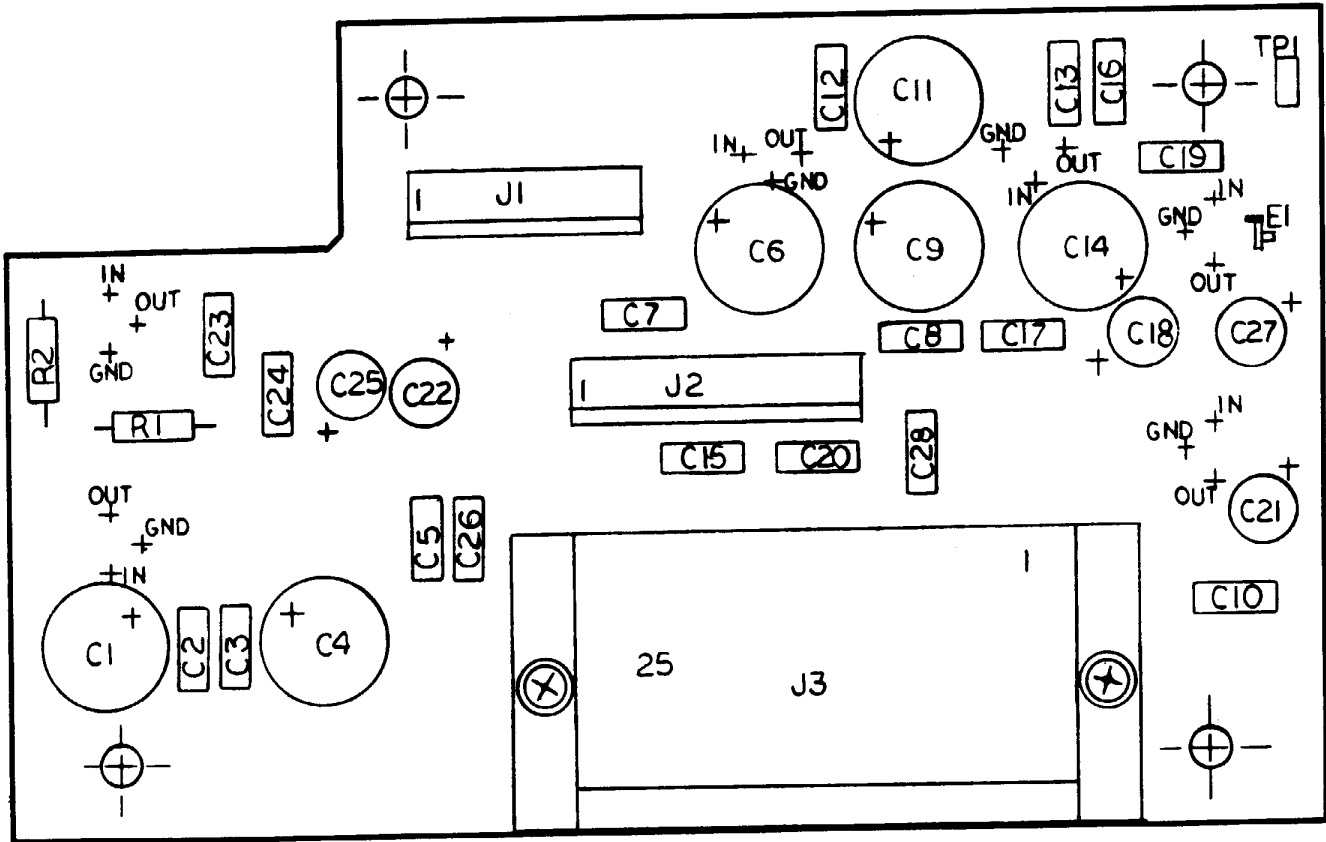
Power Supply Heatsink Assembly A15A2 Component Location Diagram (10073-3250, Rev. C)
